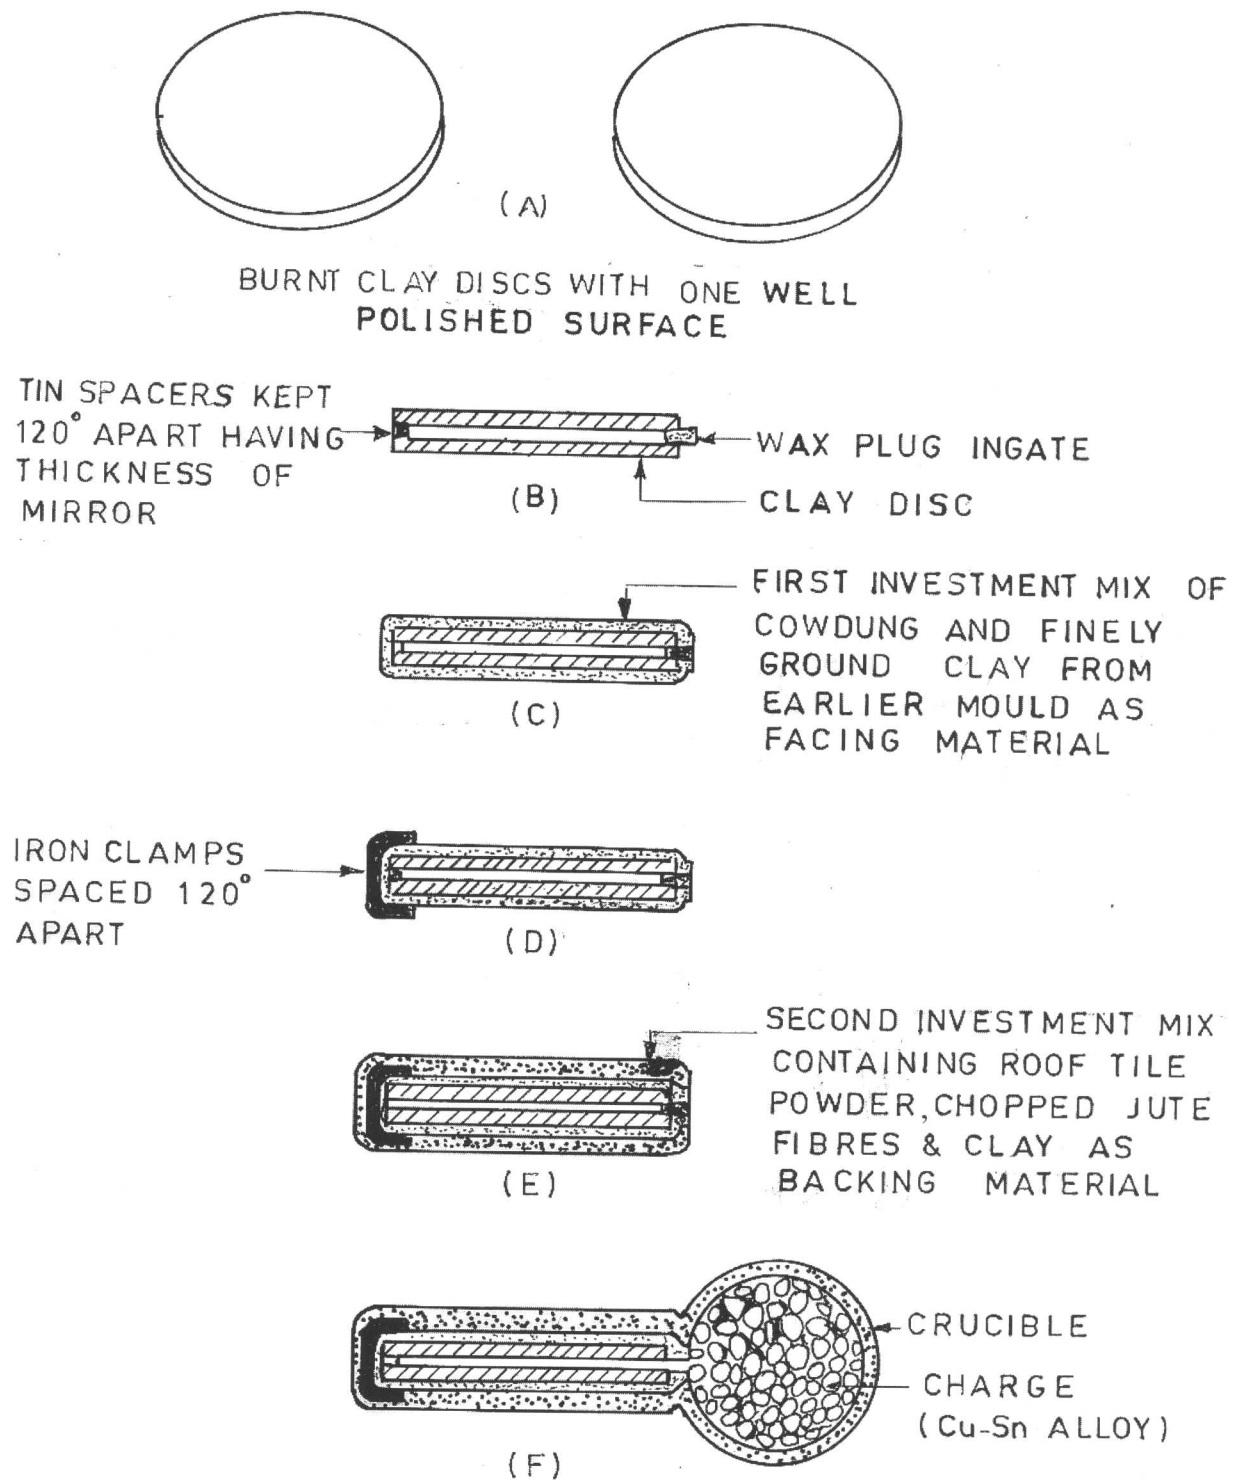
Various steps in the preparation of the mould-crucible assembly for casting an Aranmula Metal Mirror disk.
